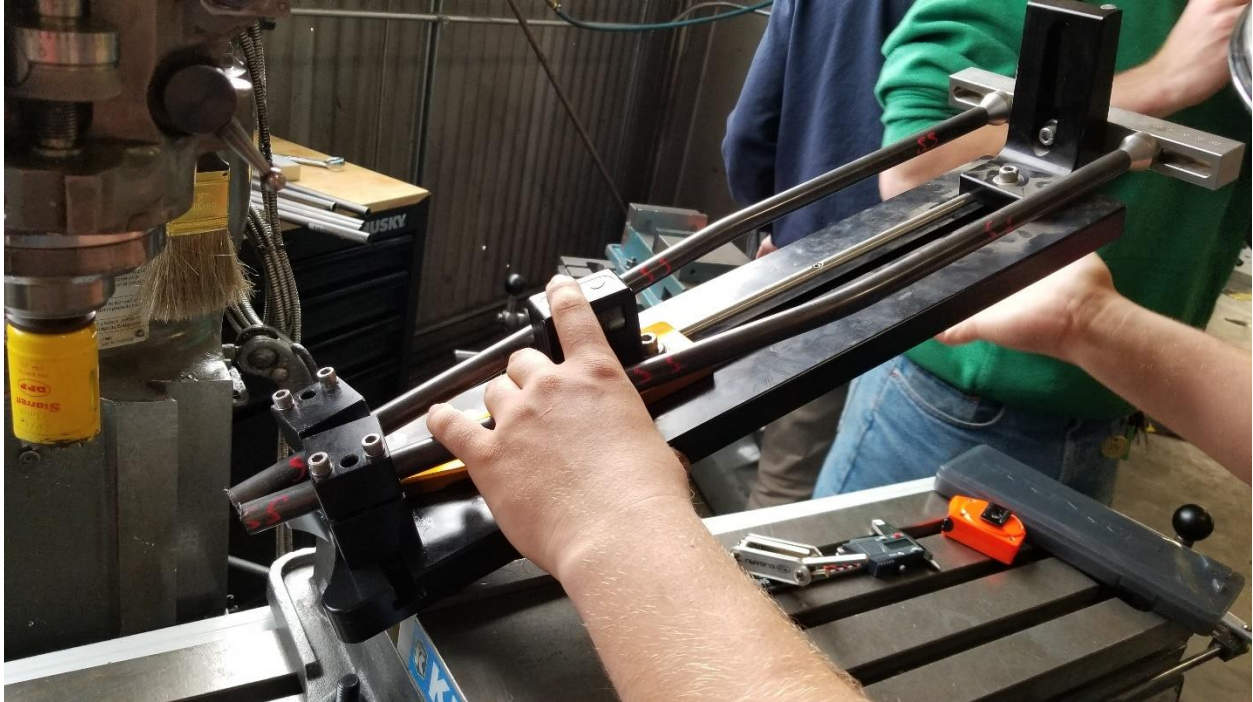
Another Anvil fixture used for tubes attached to the seat tube
